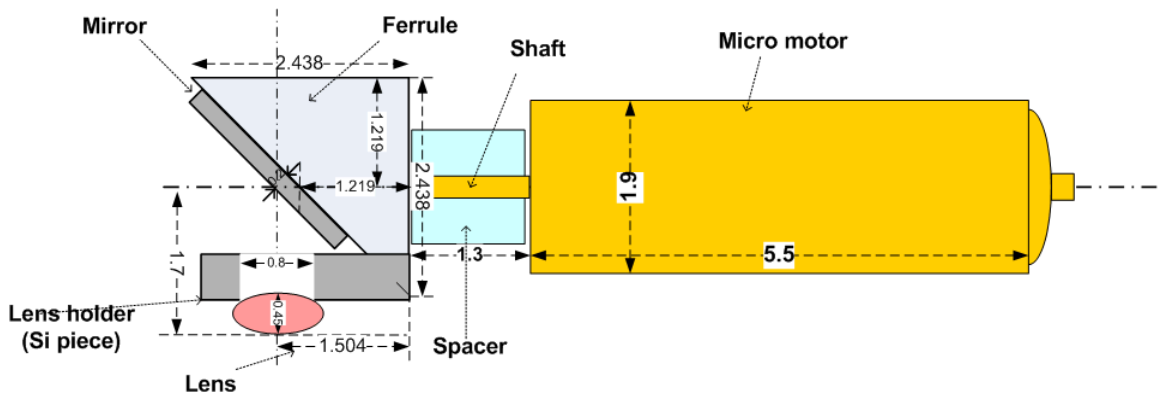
(a) shows the optomechanical drawings of the axicon-based micromotor endoscope catheter probe assembly. A 2.5 mm outer diameter collimating optics was pigtailed
